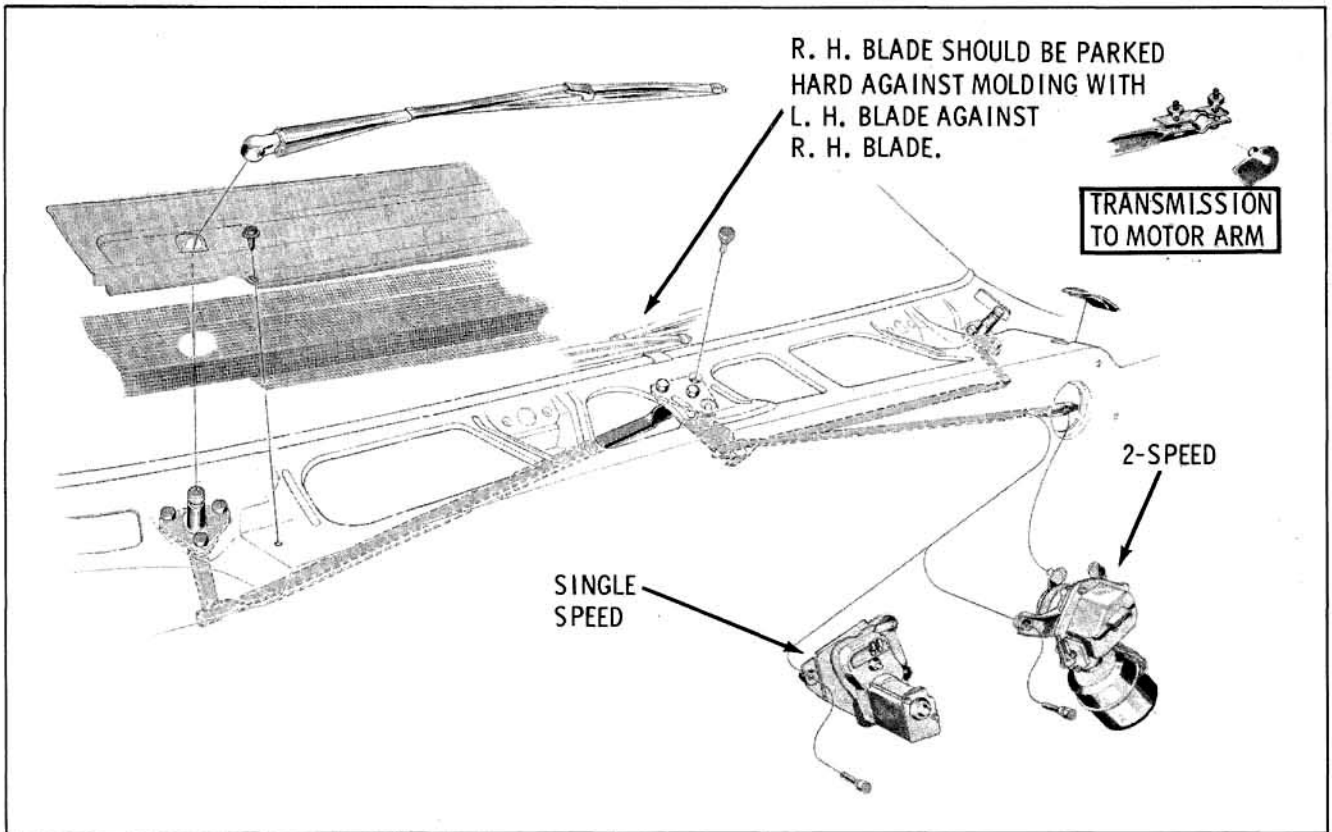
Wiper Mounting (52 thru 8600 Series)
